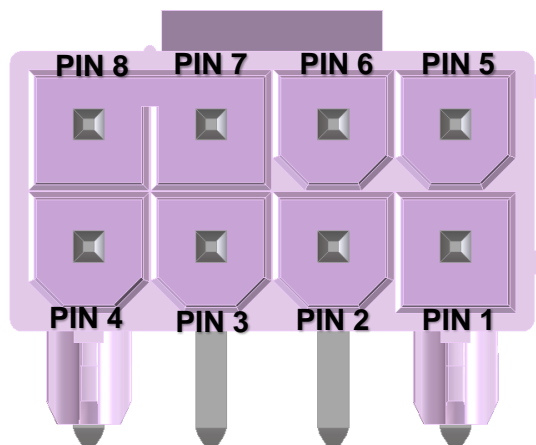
2x4 Auxiliary Power Connector Header Side Pin-out
